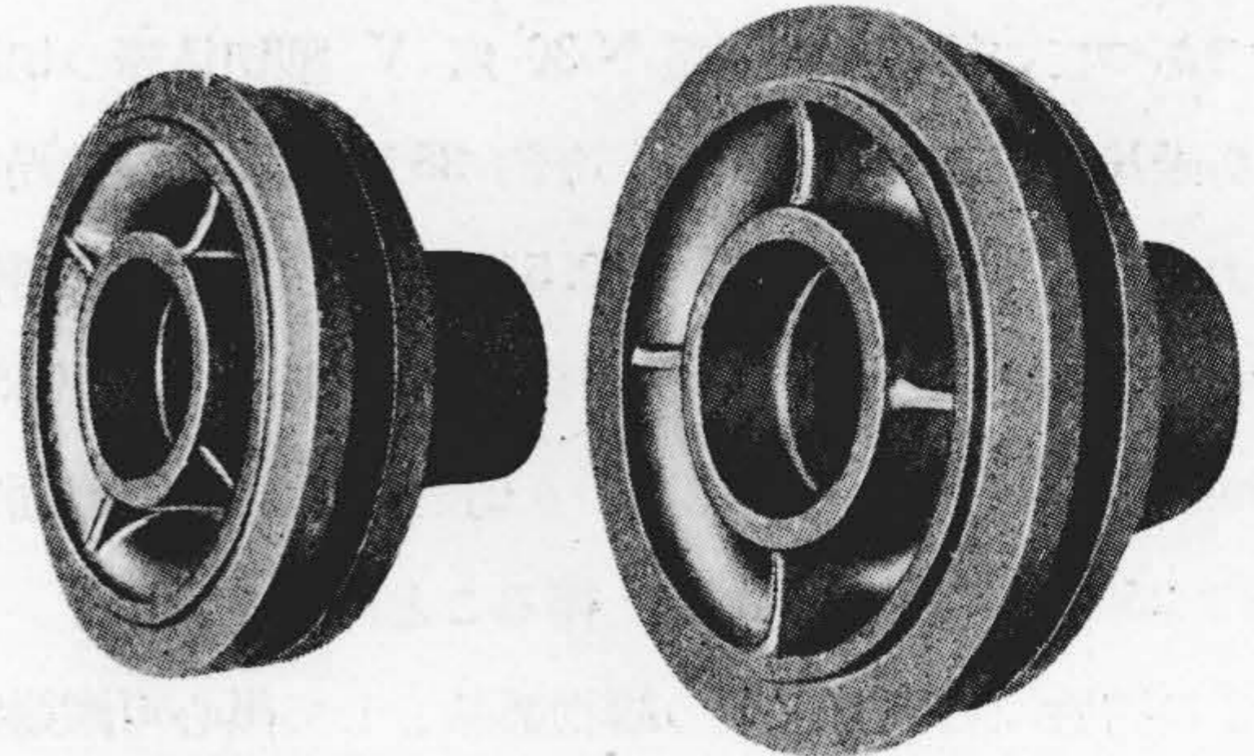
Brake Drums of Automobile Foundry Parts : — At the left. Steel Casting (Casting weight : kg) ; At the right. Malleable Casting (Casting weight : kg)
